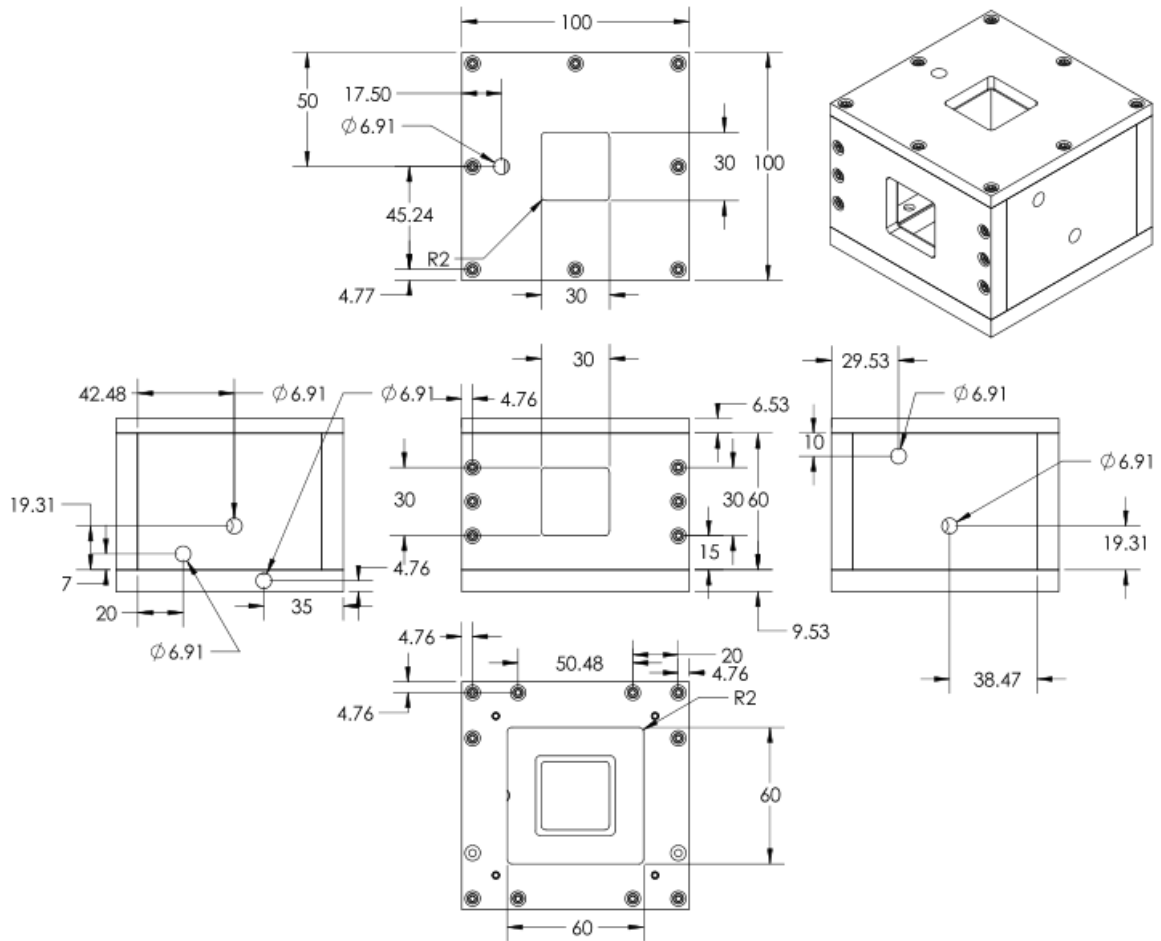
CAD drawing of the acrylic chamber (all measurements in mm).
